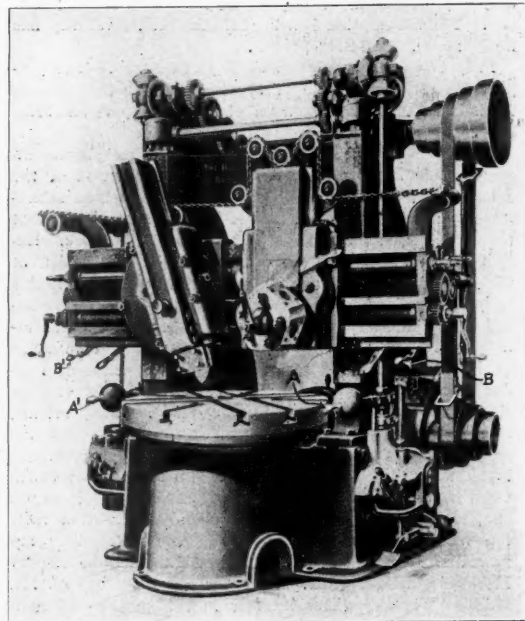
Bullard 42-in. Boring and Turning Mill.
